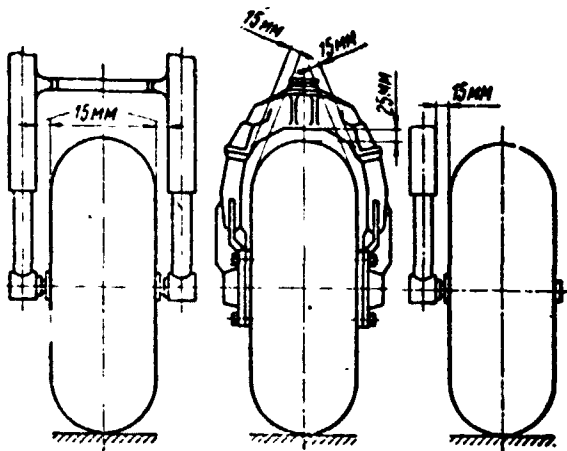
Minimal allowable clearances between wheel and gear structure.
